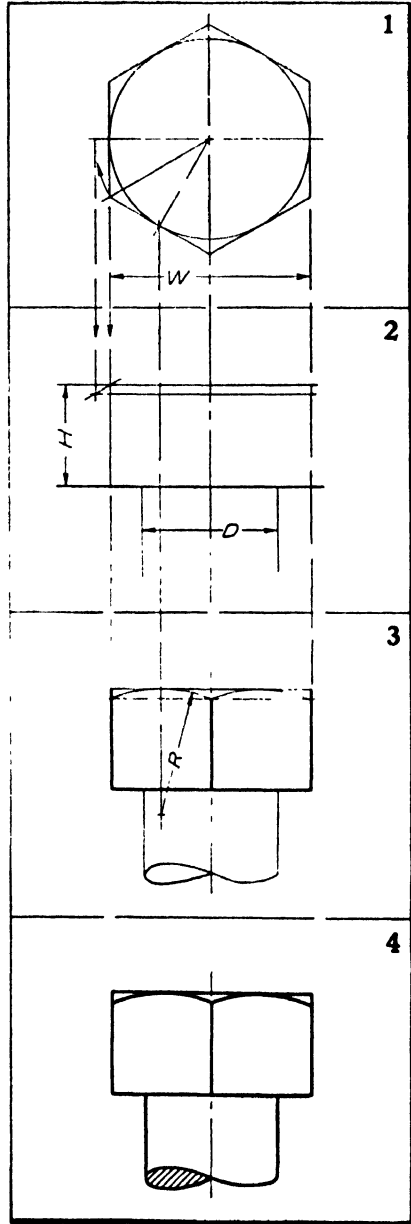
Method of drawing a hexagon bolthead across flats.
